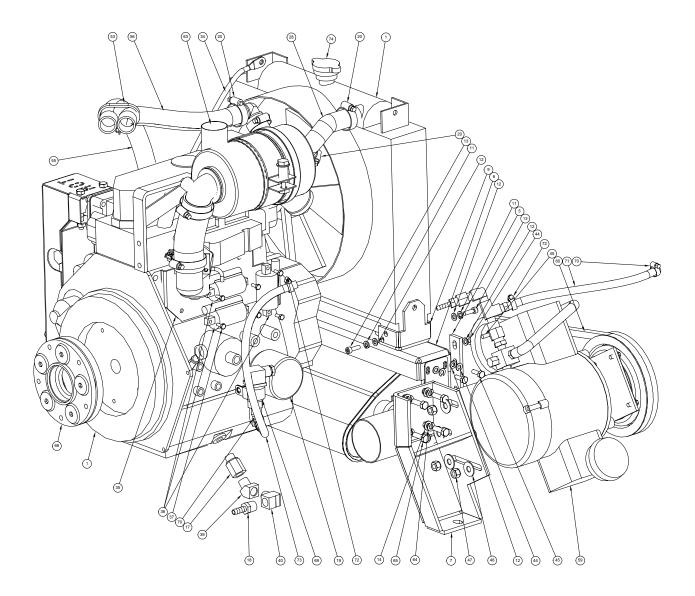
Compressor Regulator Assembly C-6249 Rev B
